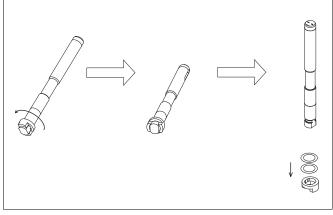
Detaching the thrust ring in sizes 1" and 1.5"
